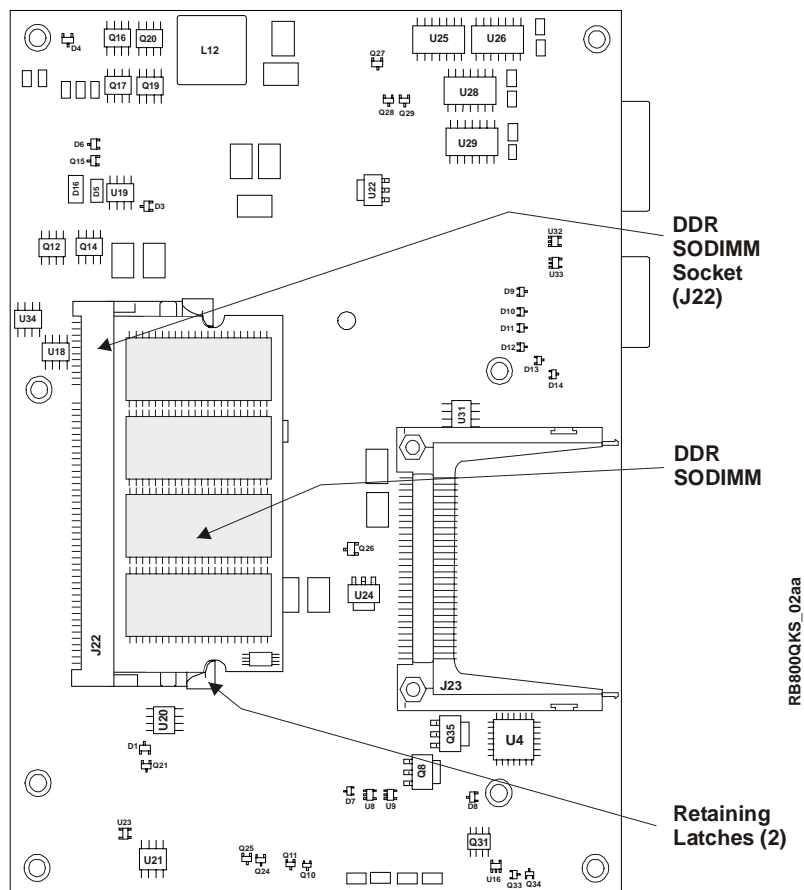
ReadyBoard 800 SODIMM Location (Bottom view)
